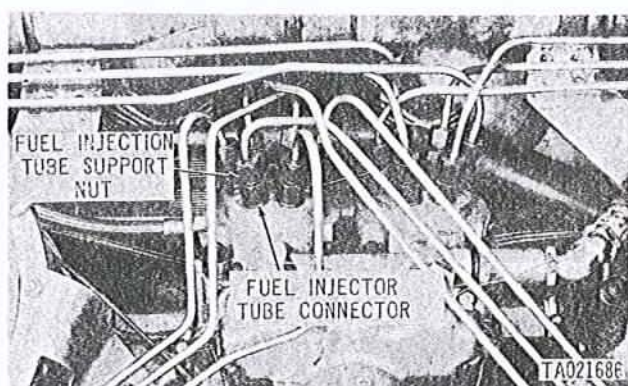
Removing or installing fuel injector tubes from fuel injection pump.
